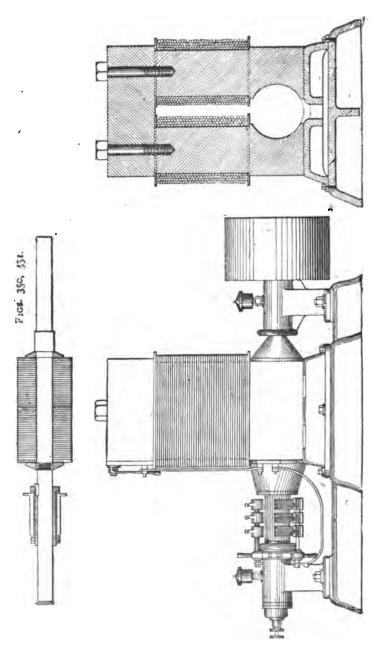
Edison-Hopkinson Dynamo: Elevation, Section, and Section of Armature.
